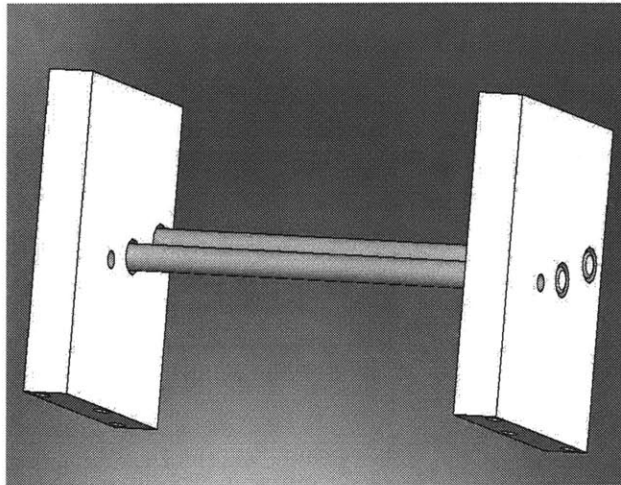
D: Modified design of the stamping cylinder blocks. Three holes were drilled on each block to hold the rod in different positions to vary the wrap angle.
